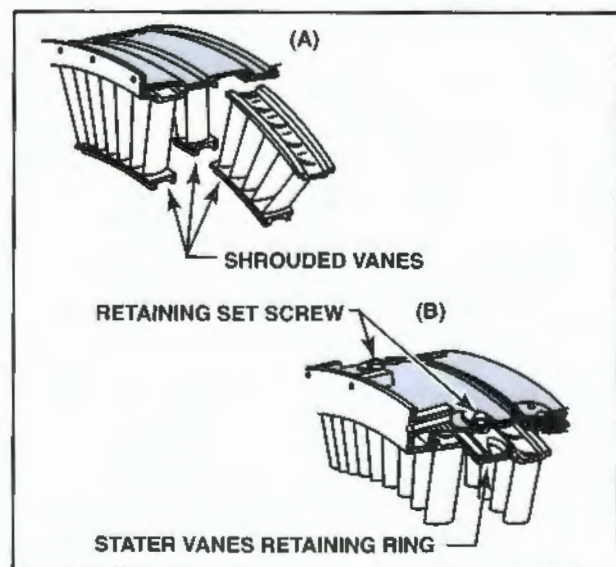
Compressor stator vanes can be attached directly to the compressor case (A) or to a retaining ring that is attached to the case by a retaining screw (B). In addition, stator vanes are sometimes equipped with shrouds to minimize the effects of vibration.
